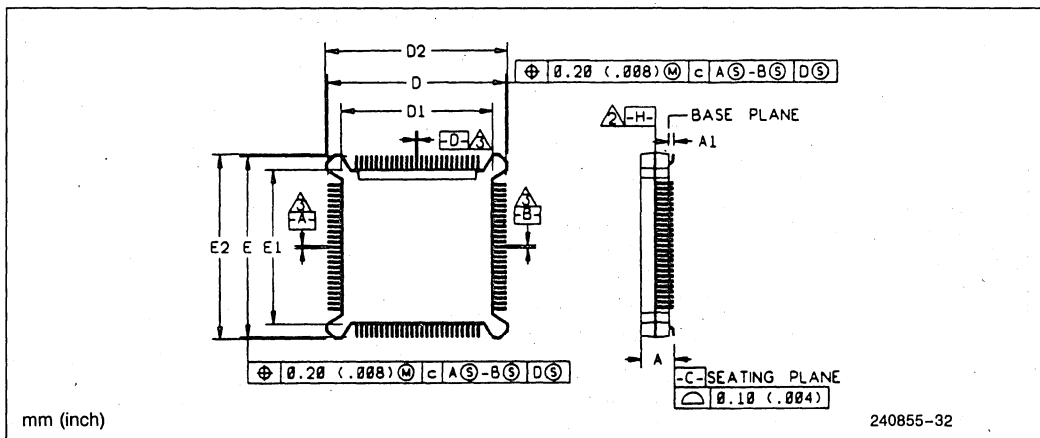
Principal Dimensions of the 82750DB in the 132-Lead PQFP Package
